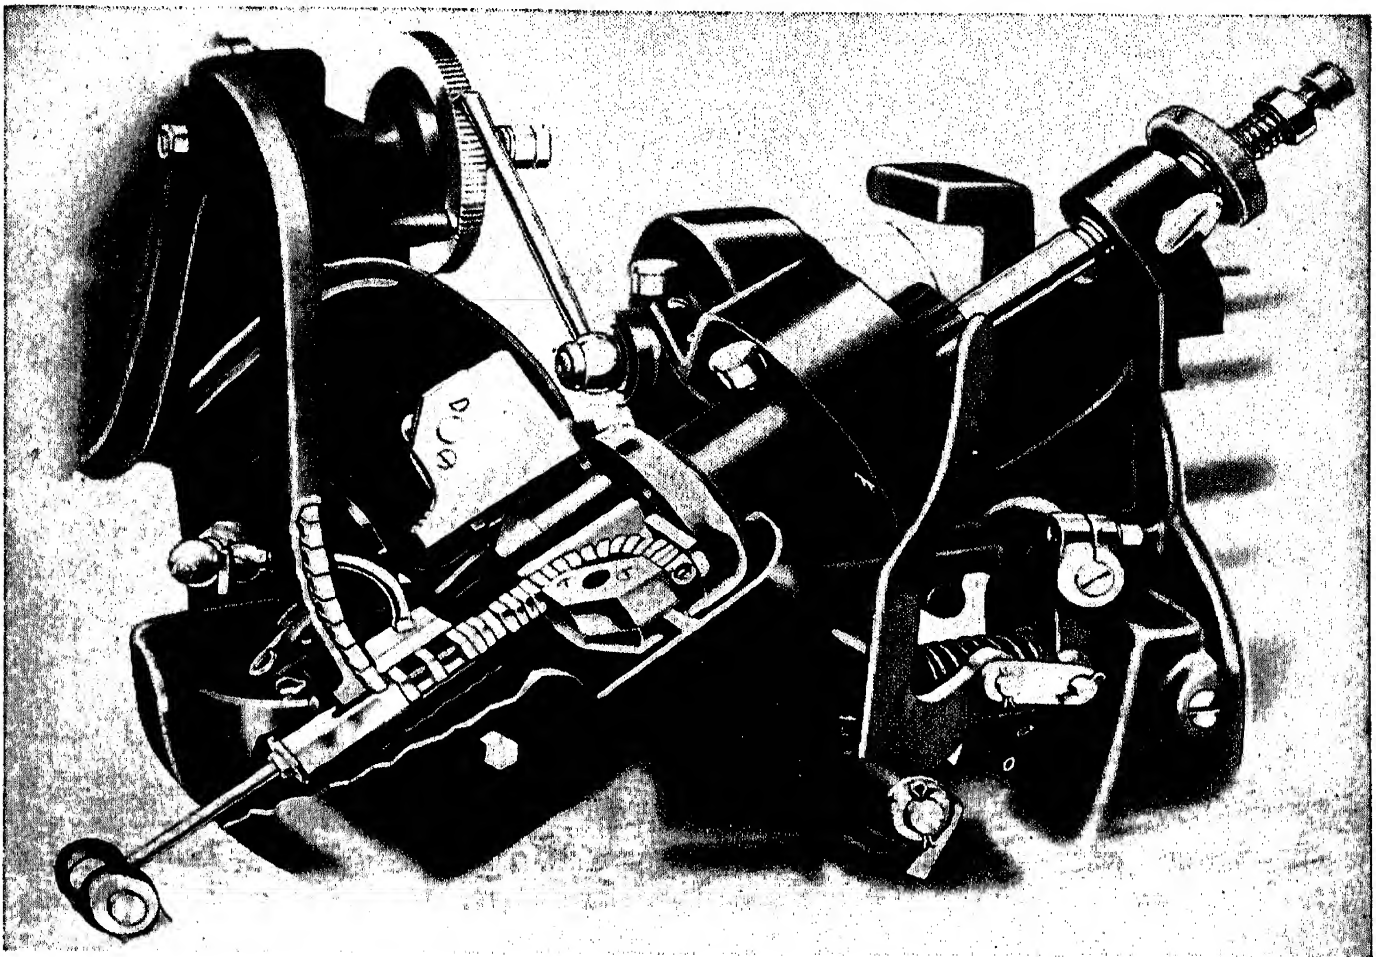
A sectional view of the head of an automatic tapper that uses a bent tap. (Courtesy The National Machinery Co.)
